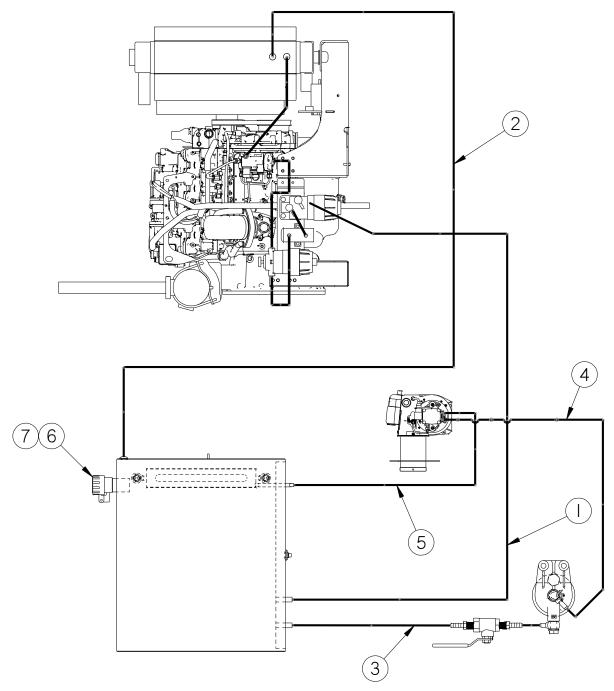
Diesel Fuel Line Schematic – Non-Compressor
